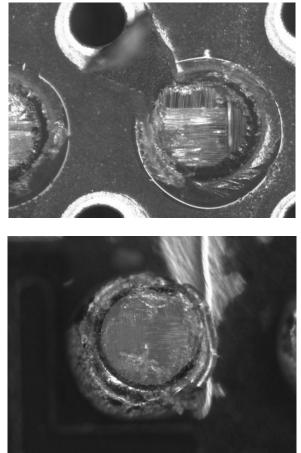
Pad cratering, revealing glass fibers in the laminate on the PCB side (top) and the solder joint with lifted pad on the BGA substrate (bottom).
